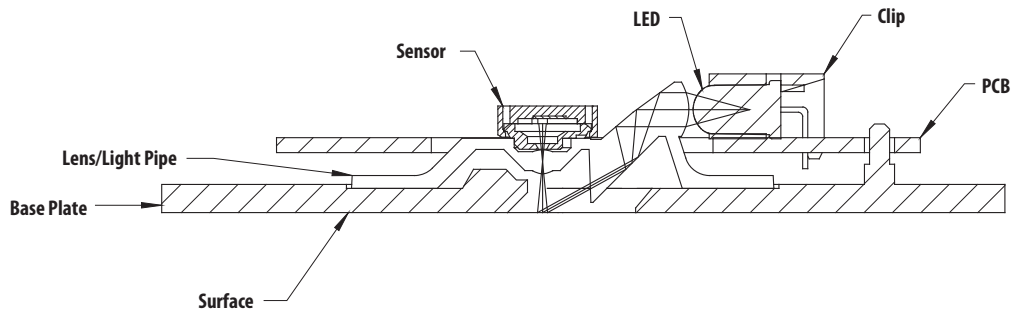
Sectional view of PCB assembly highlighting all optical mouse components (optical mouse sensor, clip, lens, LED, PCB, and base plate).
